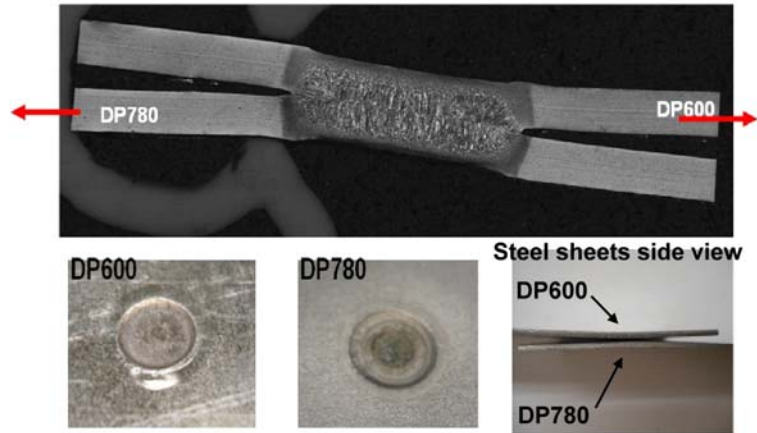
Cross-section of DP600_B-DP780_B partial lap-shear tensile test at 1.0 mm displacement of the crosshead showing rotation of the weld nugget.
